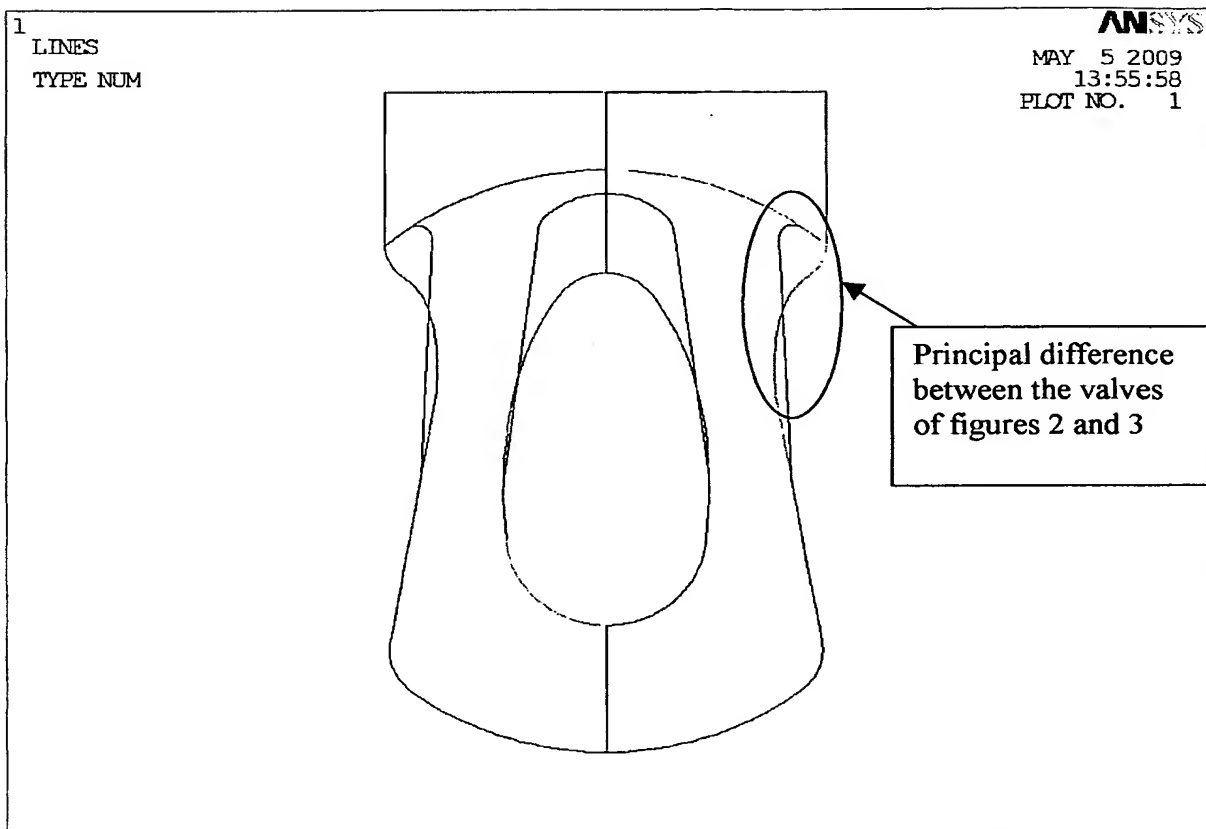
Superpose Whirlpool-Embraco and combined (Embraco with US4061443) valve solutions.
